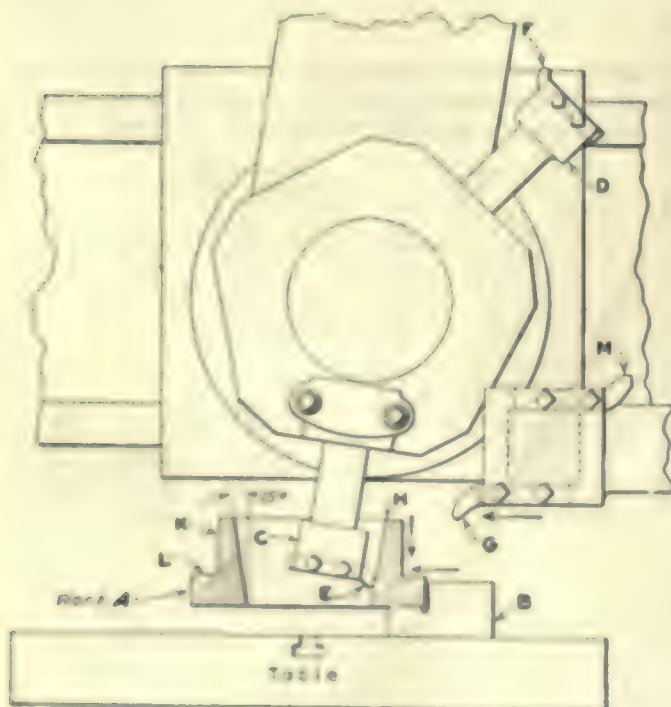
GENERATING A TAPER INSIDE SURFACE
